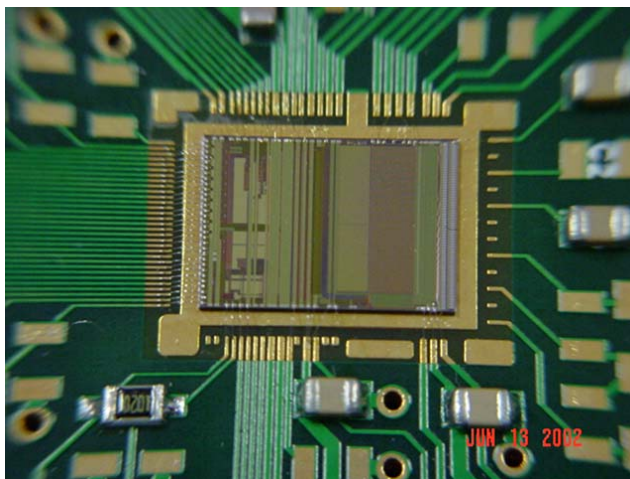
A photograph of the prototype SVX4 chip mounted on chip carrier board.
